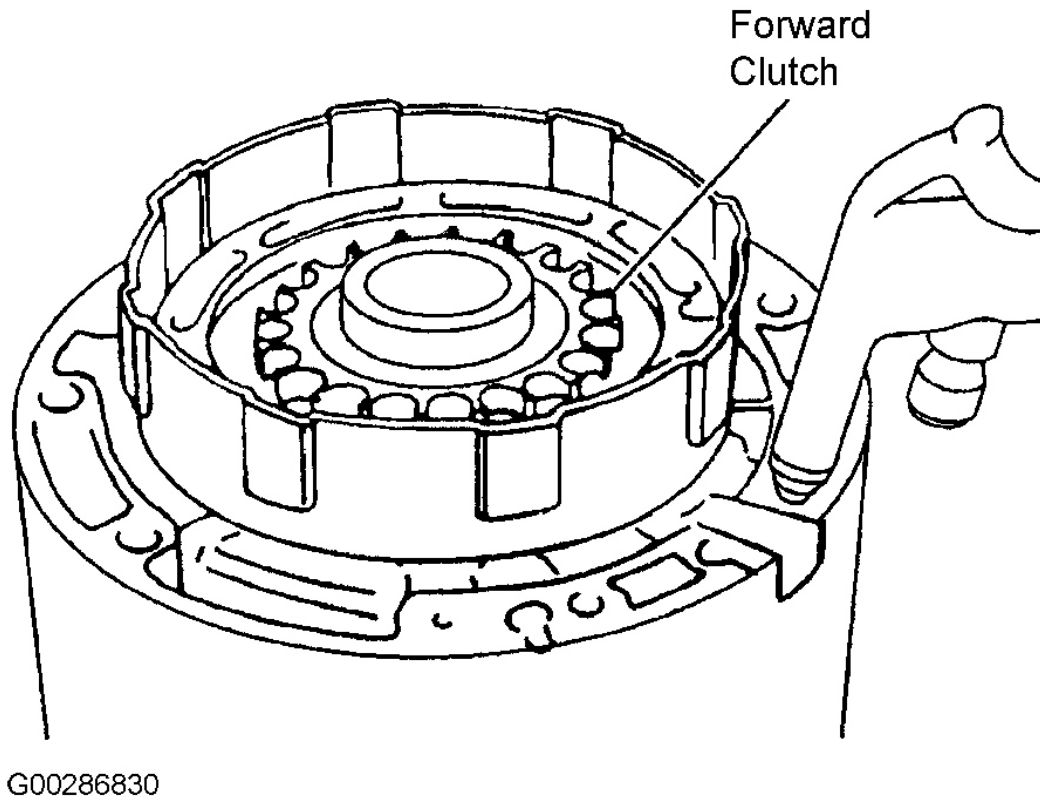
Applying Air Pressure To Remove Forward Clutch
